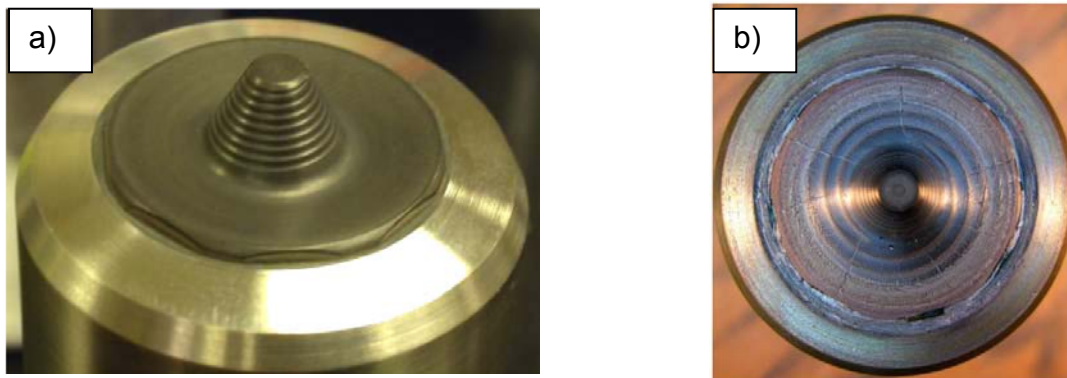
PCBN tools used to friction stir weld HSLA-65 steel. a) a smooth concave shoulder (7°) with a step spiral conical pin and b) illustration of radial cracking in a PCBN FSW tool. [59]
